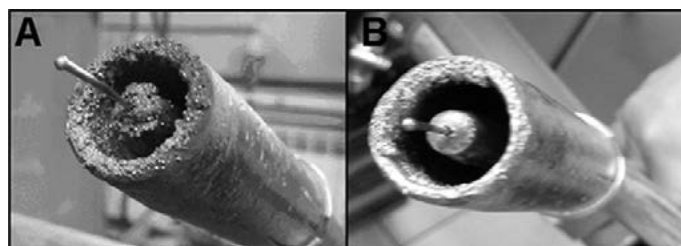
Nozzle and contact tube without the anti-spatter substance. A- after 5-min long welding, B- after removing most spatters.
